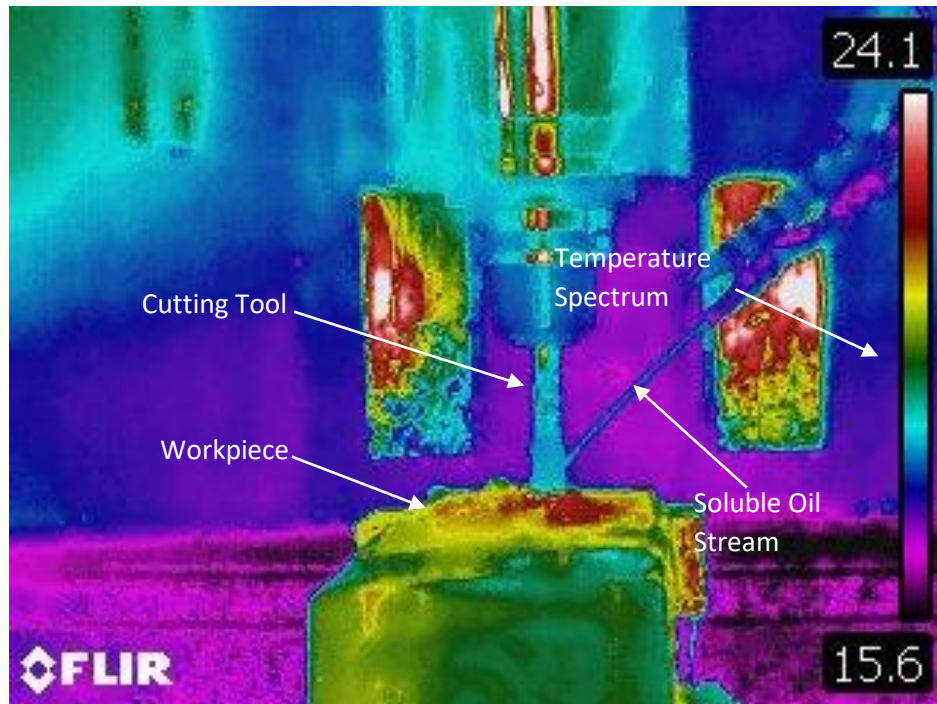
Thermal Image of Workpiece Machined Using Soluble Oil
